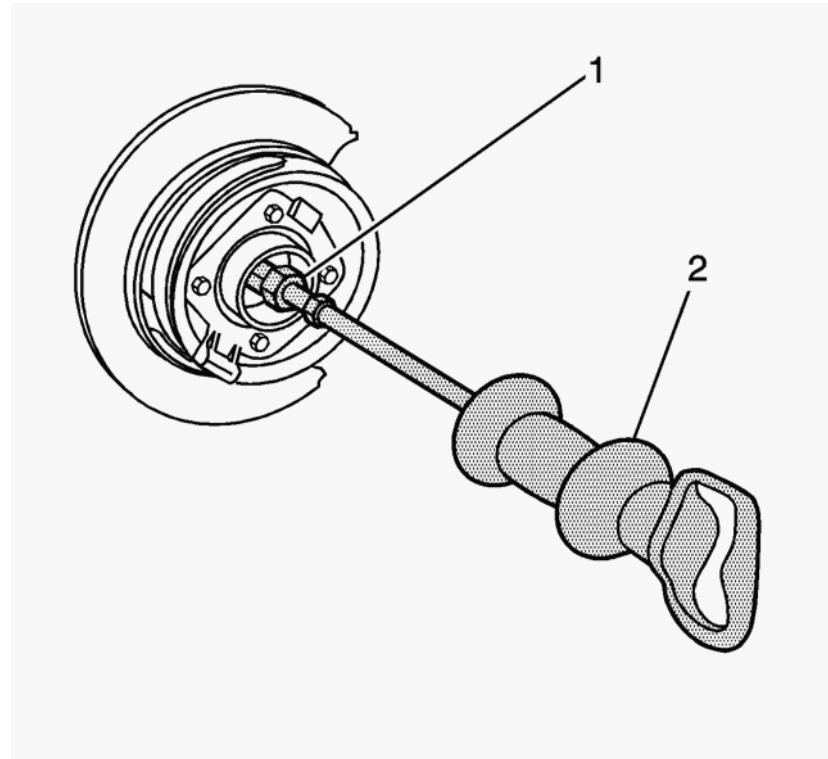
Removing Rear Axle Shaft Seal, Bearing And Wheel Speed Sensor Reluctor Ring
